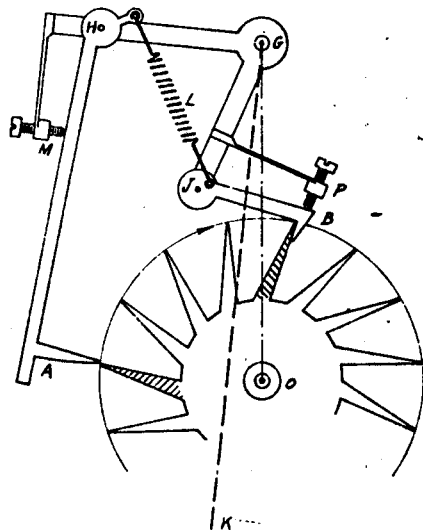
Recoil has taken place, the entry-pallet has cleared its wheel tooth, and the pendulum is about to be impulsed to the right by the wheel tooth engaging the exit-pallet
